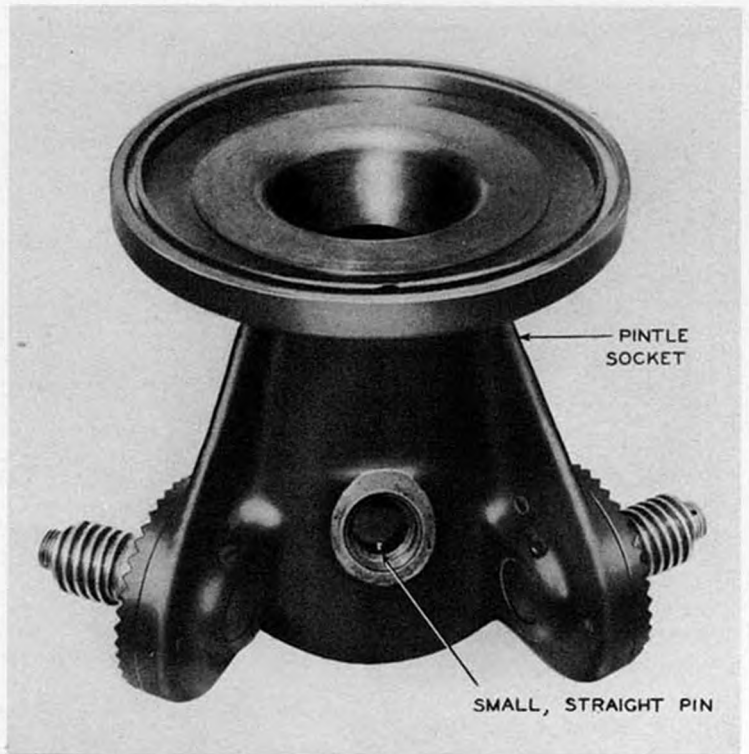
Showing small straight pin in pintle socket assembly which guides and therefore properly positions the pintle clamping block. That small pin fits into the lower recess cut on the bottom of the pintle clamping block. (Figure 21.)
